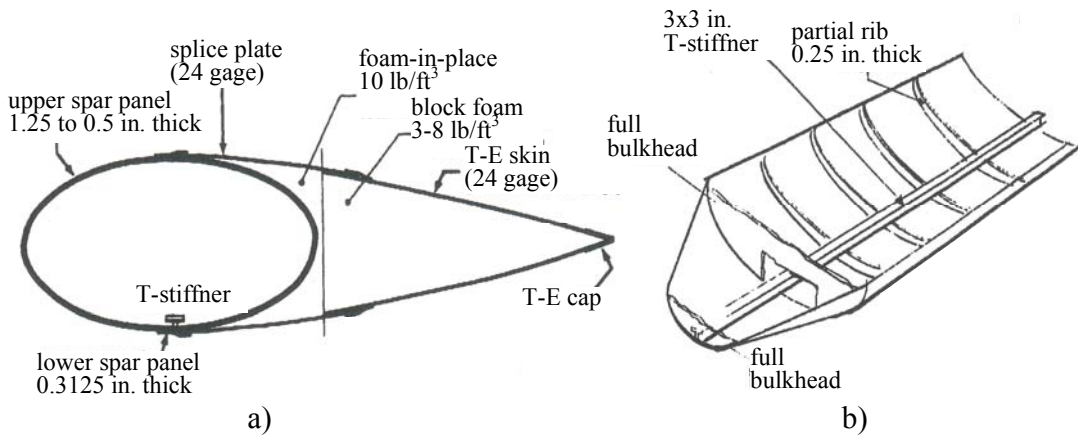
Boeing’s MOD-1 stainless steel blade [14]. a) cross-section details showing steel spar and foam trailing edge section covered with stainless steel skins, b) lower spar panel details.
